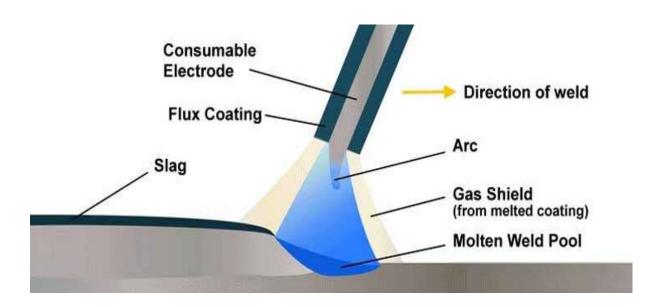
Schematic diagram of Shielded Metal arc welding process
